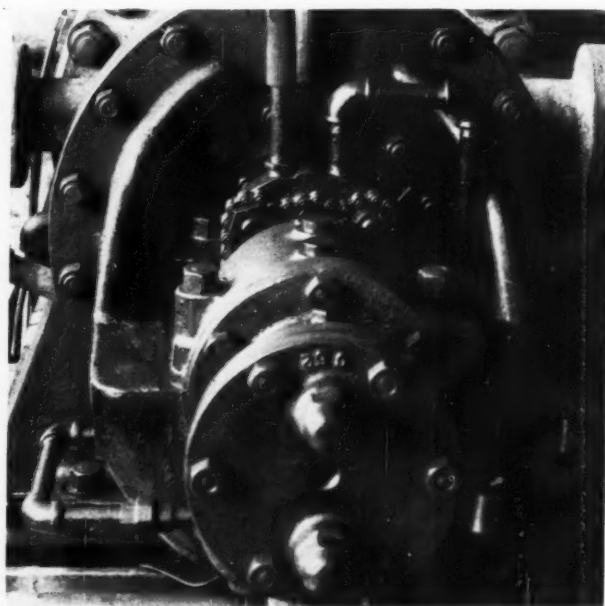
An endless chain around sprocket nuts insures uniformity in tightening packing gland
